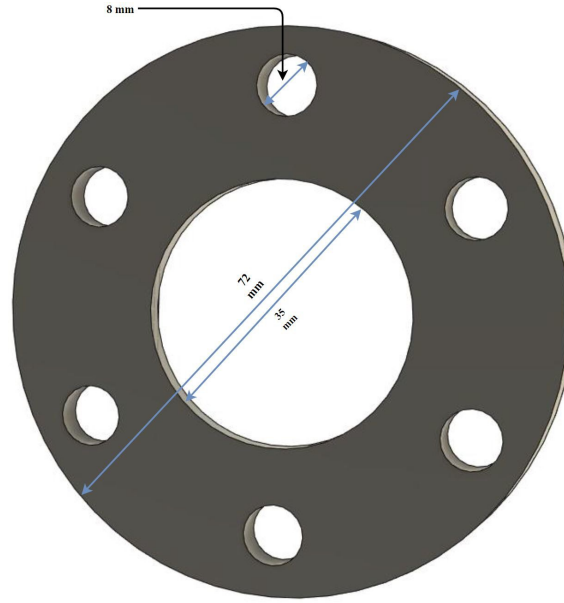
Wire-frame representation of the flange with its dimensions.
